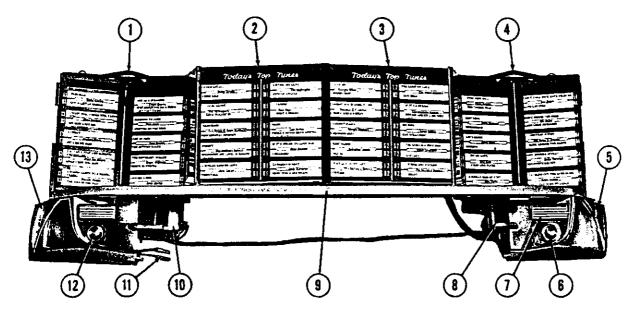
PROGRAM HOLDERS AND PAGE ASSEMBLIES
